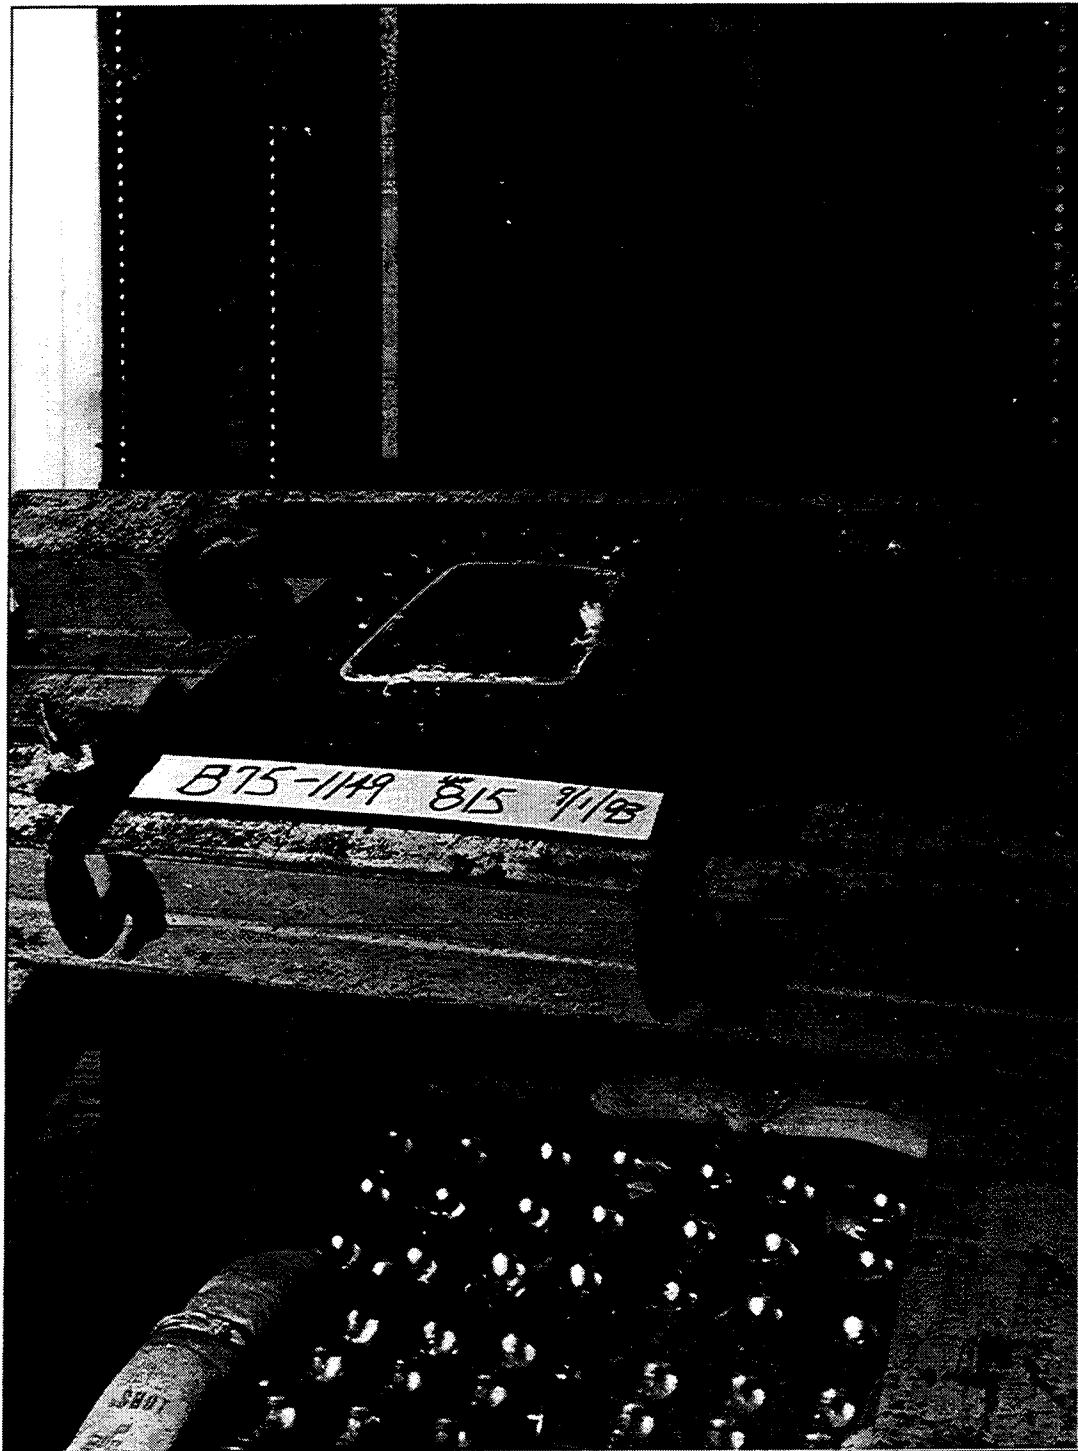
C/KC-135 #4 W/WS Showing Outboard Ply Failure From a 4-Pound Bird Impact at 247.5 Knots, Front View (Repaired W/WS, S/N B75-1149)
